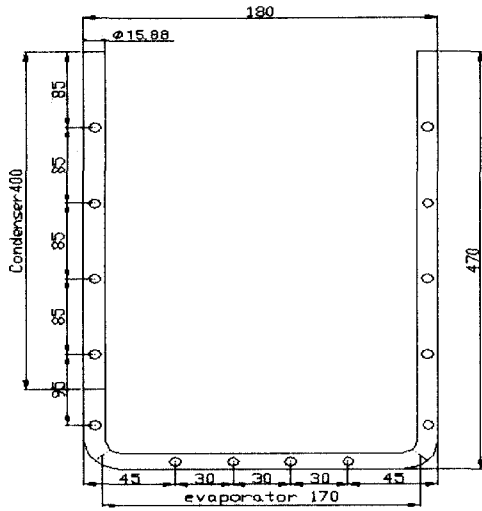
Dimension of a U-shape heat pipe and thermocouple locations (Unit : mm)
